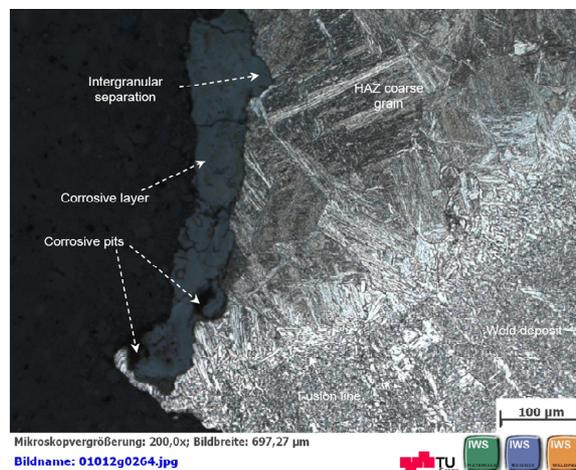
Cross section crack start showing heavy corrosive attack at the inner surface region of the pipe
